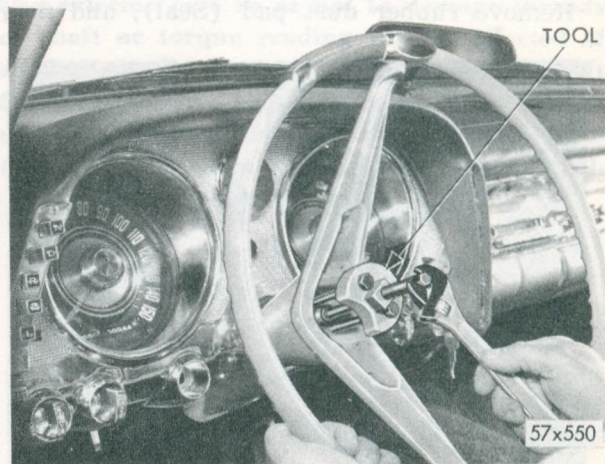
Removing or Installing Steering Wheel Using Tool C-3428
